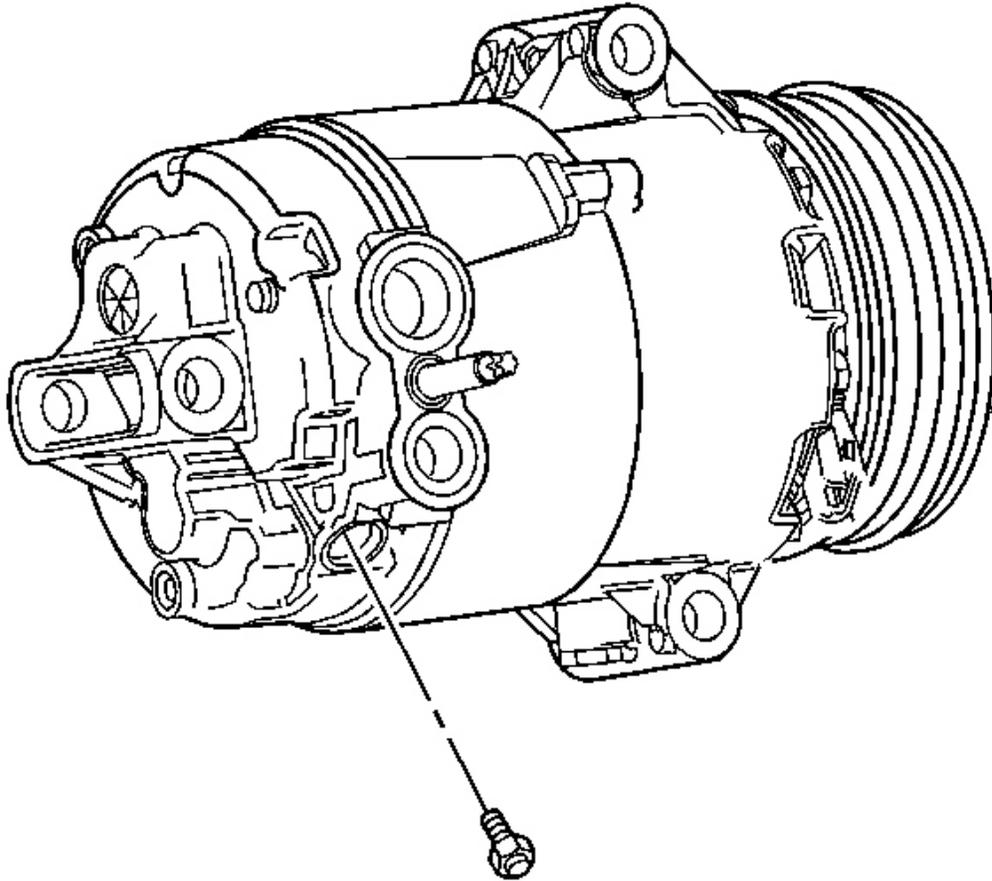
A/C Compressor Identifying High Pressure Release Valve
